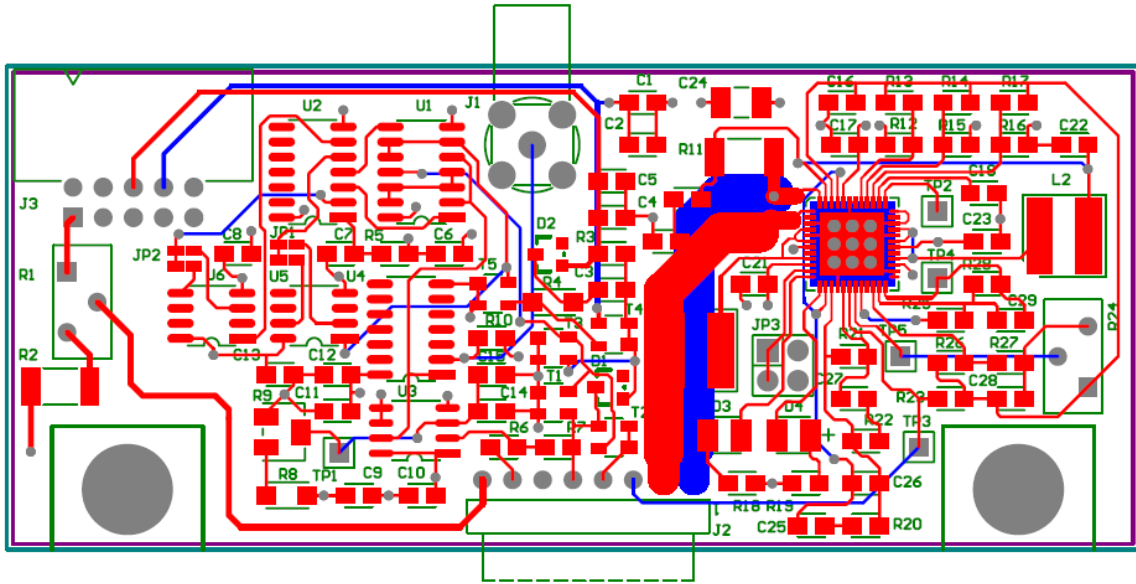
PCB layout consisting of improved quenching circuit and temperature controller.
